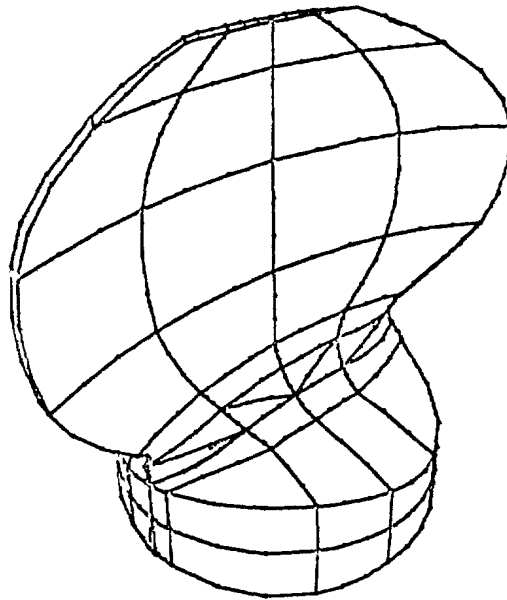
Blade-Fillet-Palm (Bolts as Rods) Model (shown without bolts)
